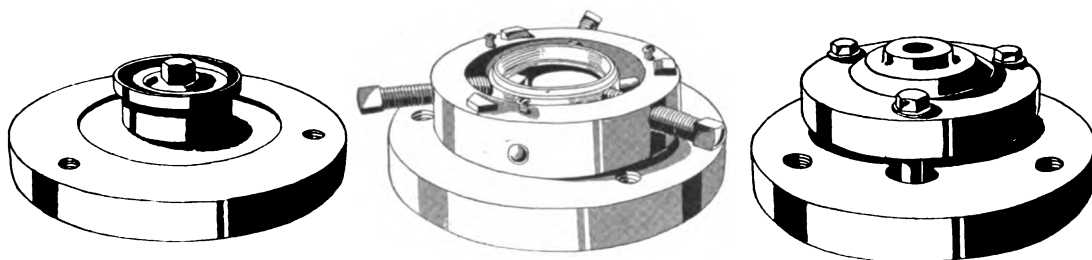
FIXTURE FOR MACHINING FASHION WHEEL
